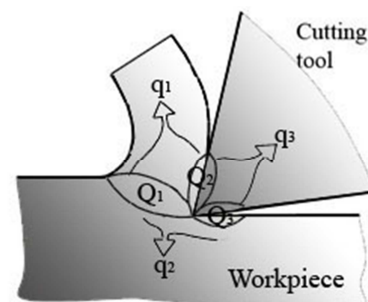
The balance of heat generation and heat dissipation in the metal cutting process.
